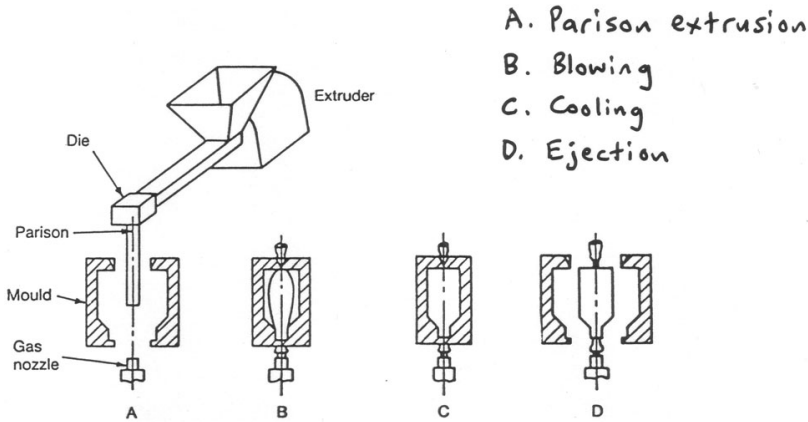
Extrusion-blow moulding (after Crawford).
